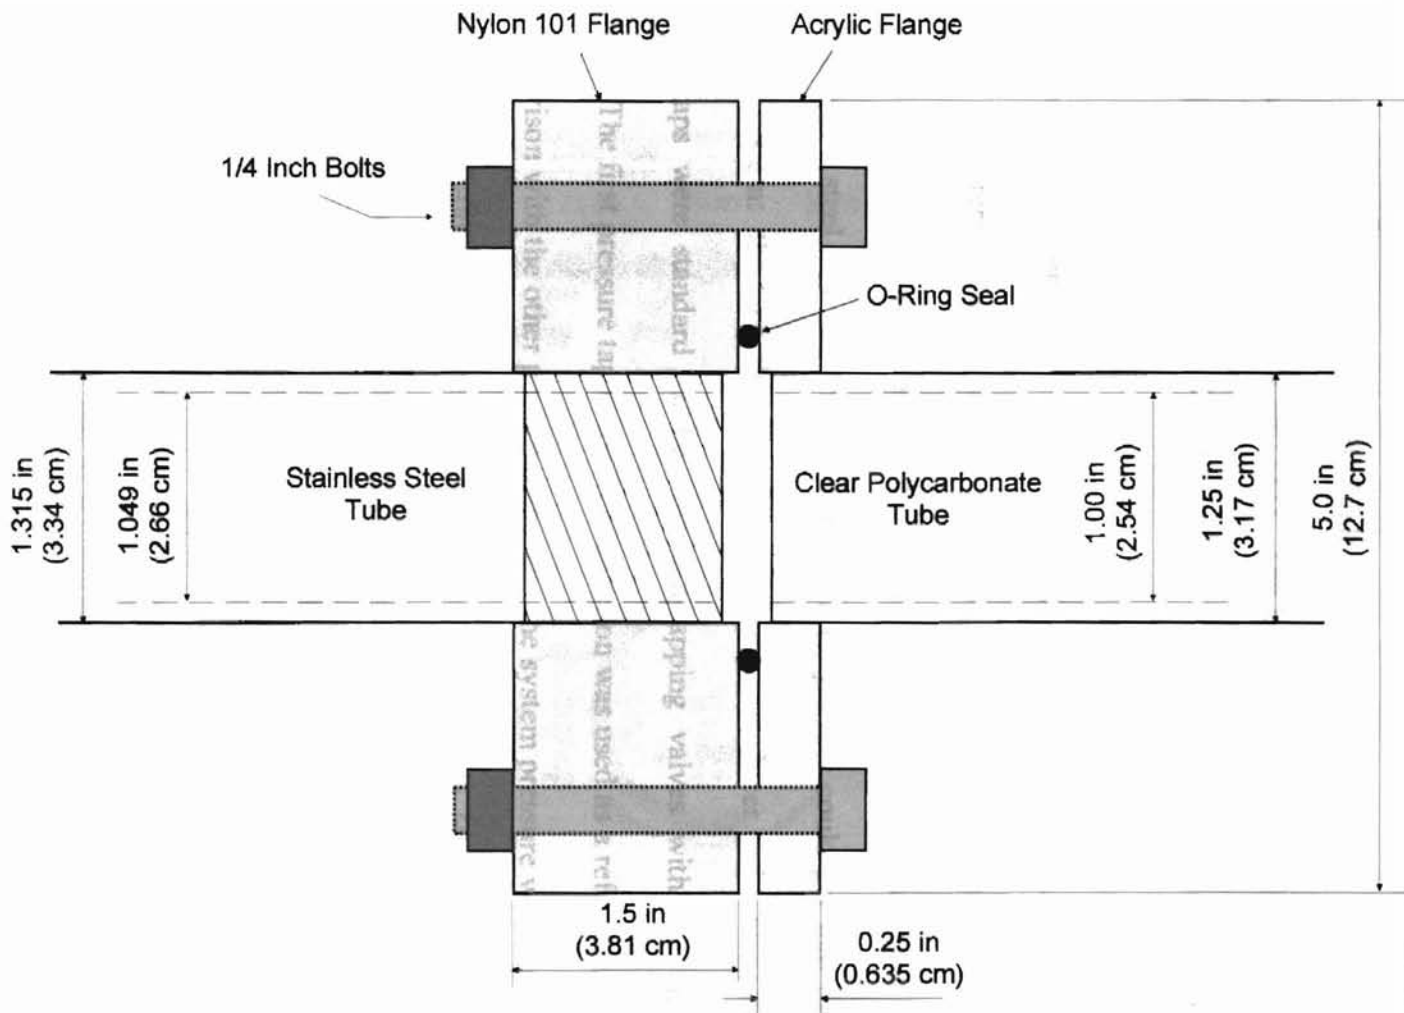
Flange Connection between Stainless Steel Tube and Clear Polycarbonate Tube
